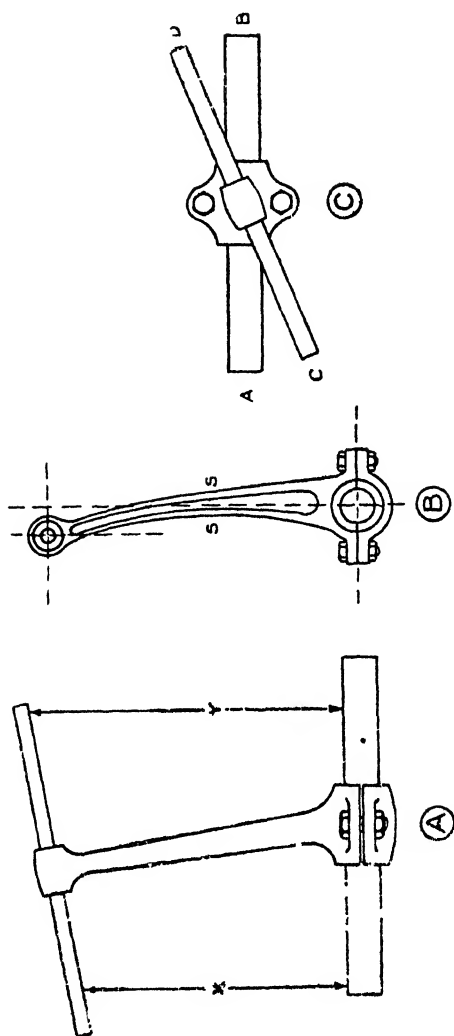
Methods of Testing for Connecting Rod Defects.
